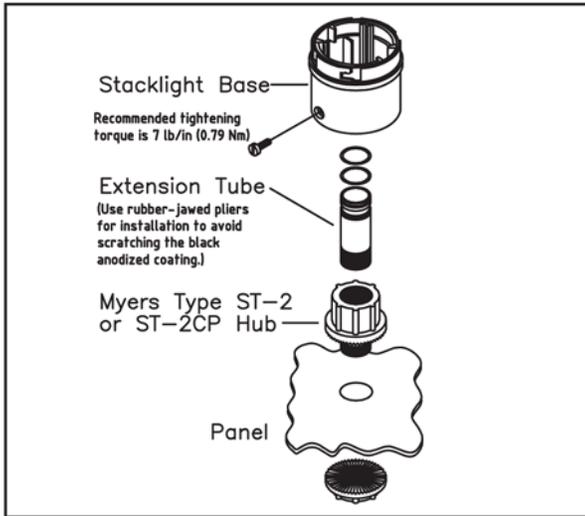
Threaded 3/4" NPT Conduit Mounting
